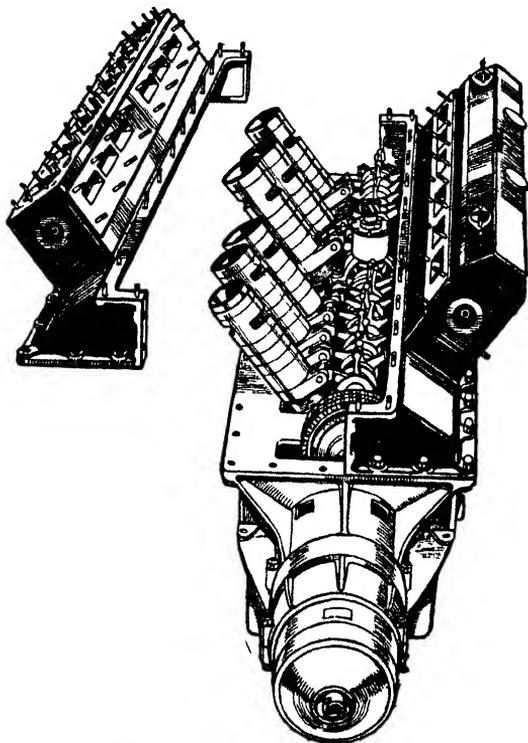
A Twelve-cylinder Vee Sleeve-valve Engine, the Voisin
